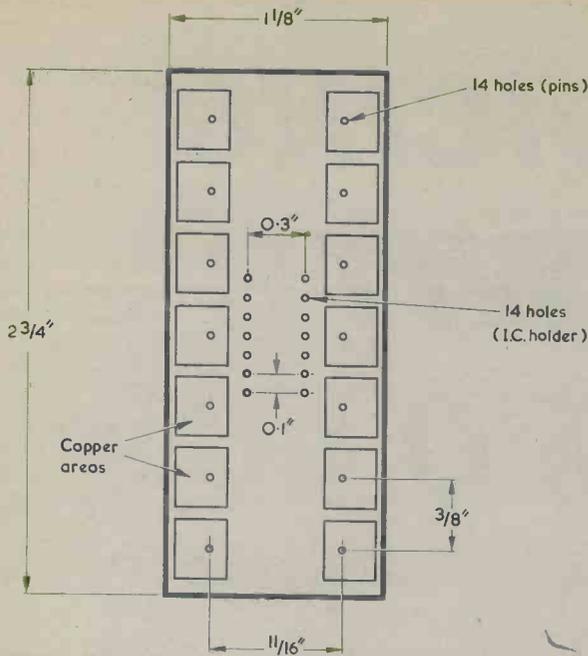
The copper pattern and holes required in the printed circuit board employed for the adaptor
